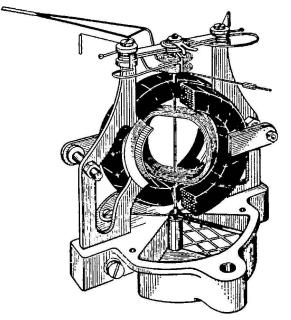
Cutaway view illustrating the construction of a commercial type of dynamometer mechanism. (Weston Electrical Instrument Corporation.)
